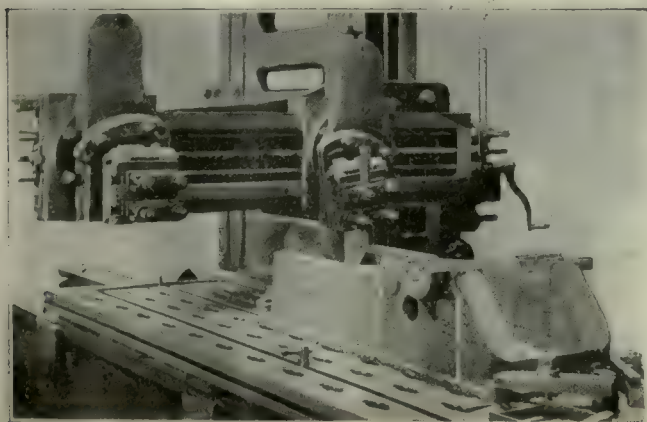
PLANING A GAS-ENGINE-BED CASTING
